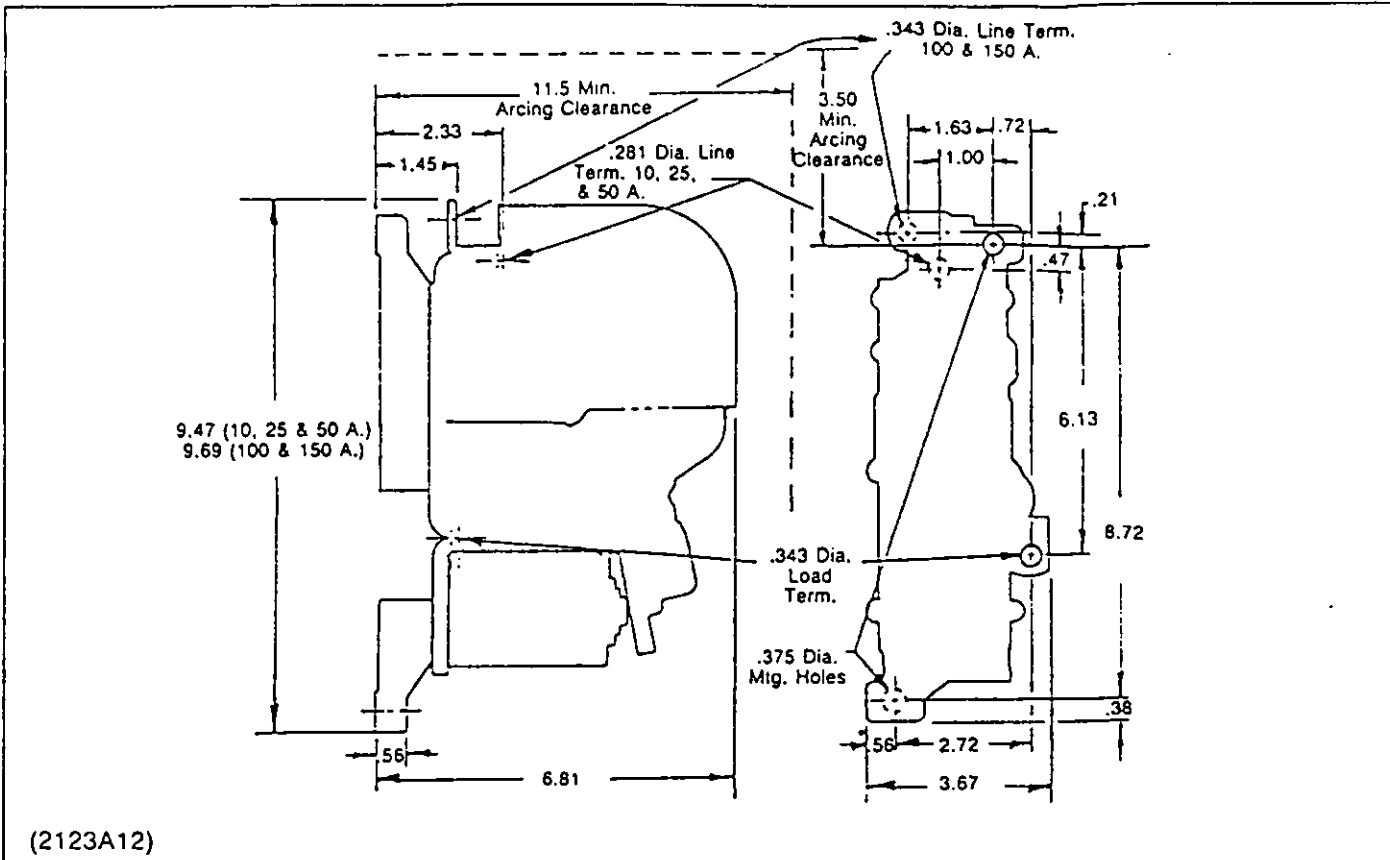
Dimension Drawings (Dim. in inches) of 1 NC Pole MME Contactor
